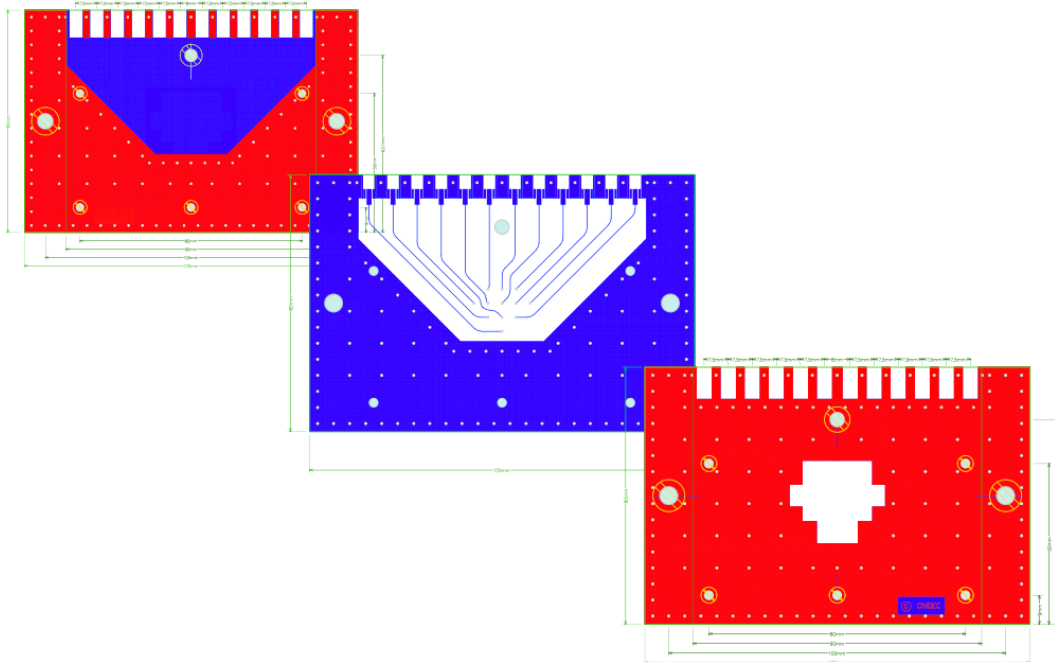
Technical drawings of the three PCB plates of the DM-D<sup>1</sup>, which are screwed together via the indicated holes. The colors indicate the metallization on the back (blue) and front (red) side. The back PCB on the left has recesses for MMIC connectors and is unmetallized on the front side, where it touches the read-out lines of the main PCB. The main PCB in the middle is shown only from the back side to show the read-out lines and the soldering pads for the MMIC connectors. The front PCB, which acts as a spacer between the diodes and the sample has recesses for the MMIC connectors and a hole in the middle for the diodes and the bonding wires. It is fully metallized on both sides.
